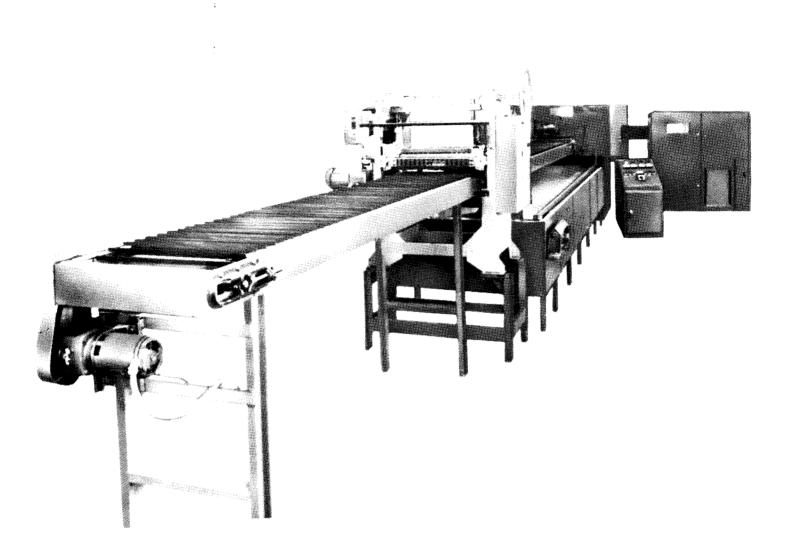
This edge bonding machine was designed to make long thick boards, such as for truck flooring. Photo courtesy of Raytherm, Inc.
